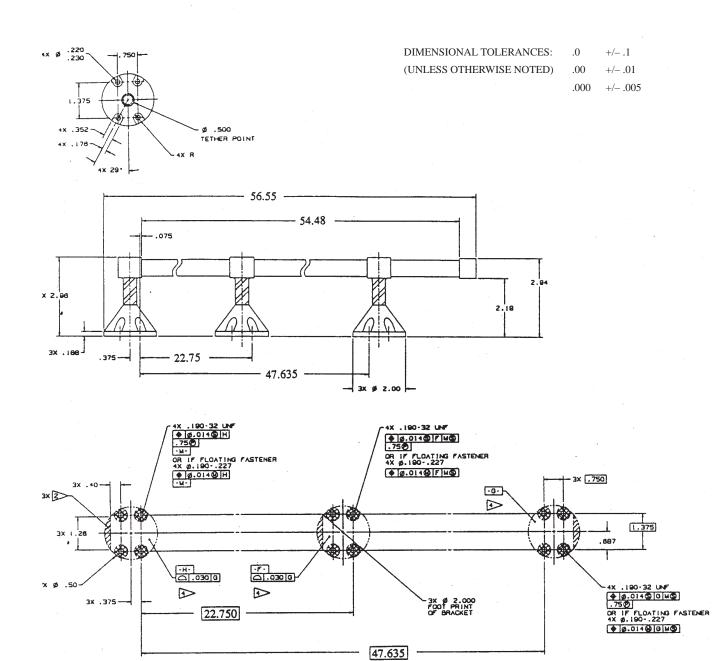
TOP MOUNTED HANDRAIL ENVELOPE AND BOLT INTERFACE (GROUND INSTALLED)
